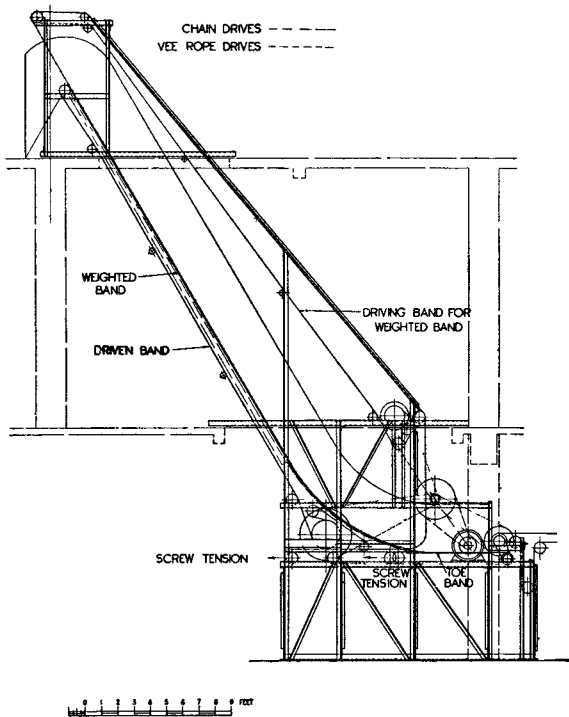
CONSTRUCTION OF TWIN-BAND RISER.
